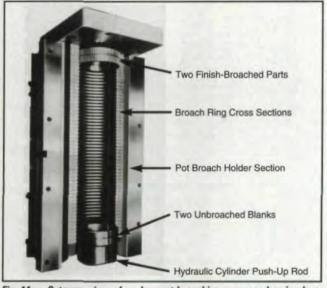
Cutaway view of pushup pot broaching process showing how two parts can be produced at a time.
